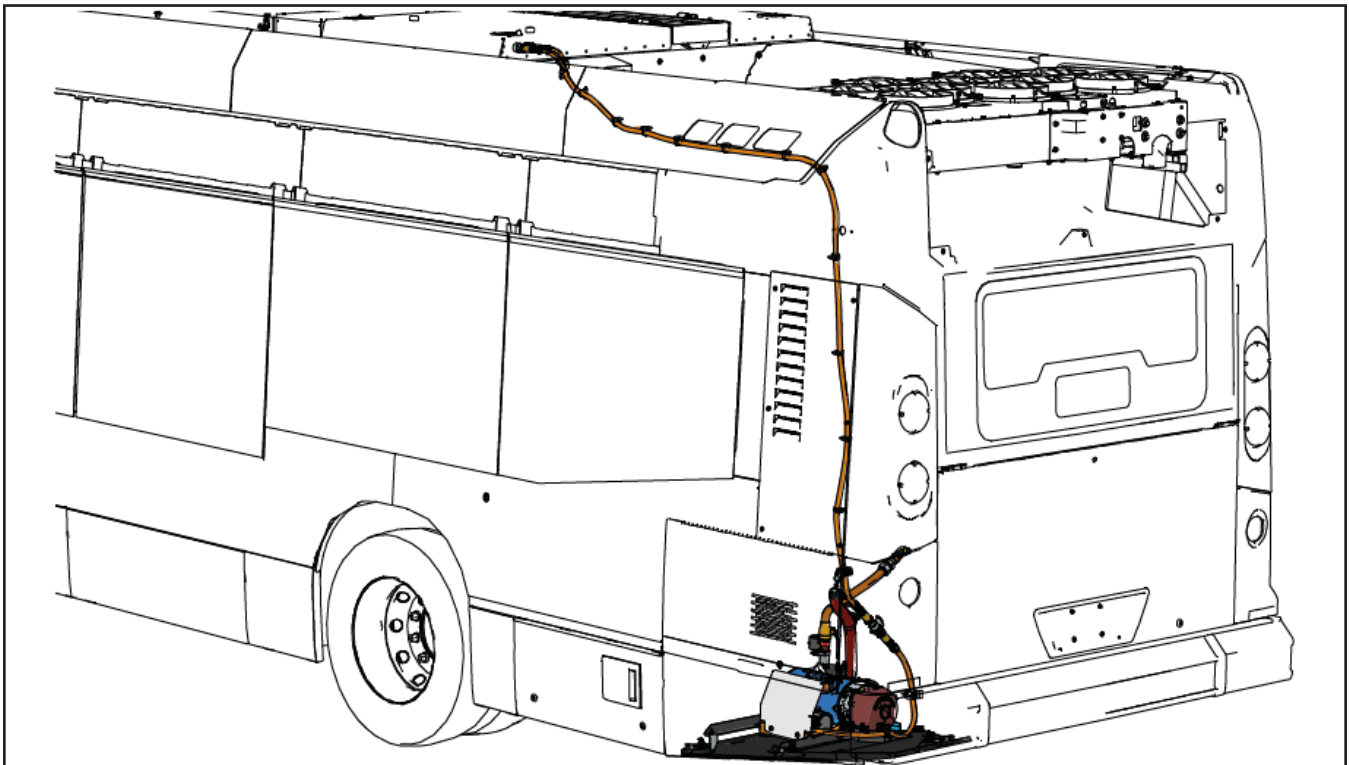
Auxiliary Heater and Rotron Recirculating Pump Location
